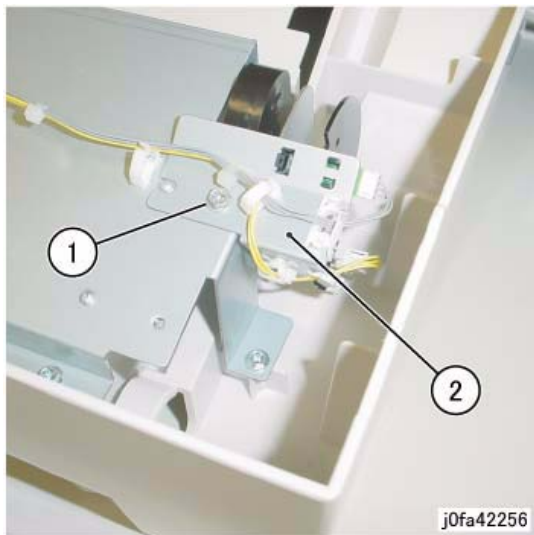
Removing the Stacker Stack Sensor Assembly (j0fa42256)
